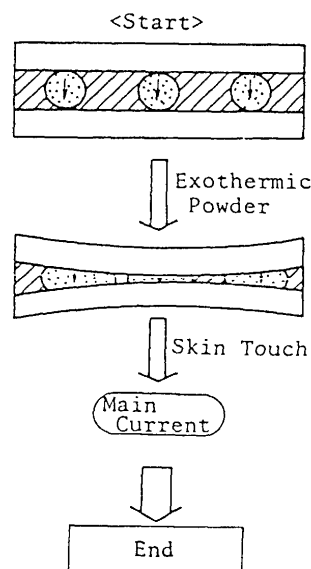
Welding process of direct-weldable damping steel sheets. (*Tetsu-to-Hagané*, 3 (1988), p. S754)
